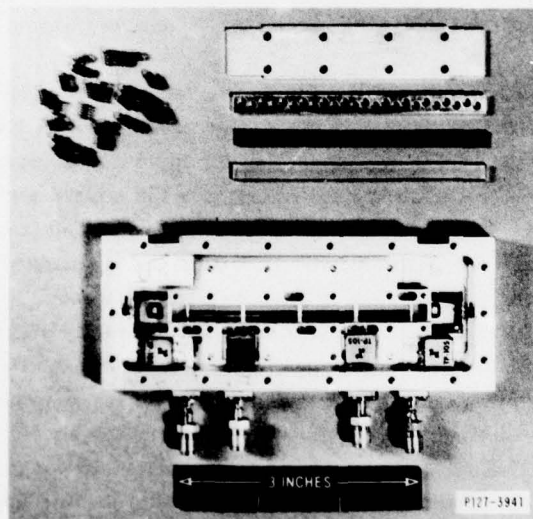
Partially assembled acoustoelectric device. Also shown are RTV pillow, beryllium-copper diaphragm, spring insert, springs and pressure plate which maintain a stable air gap during temperature fluctuations.
